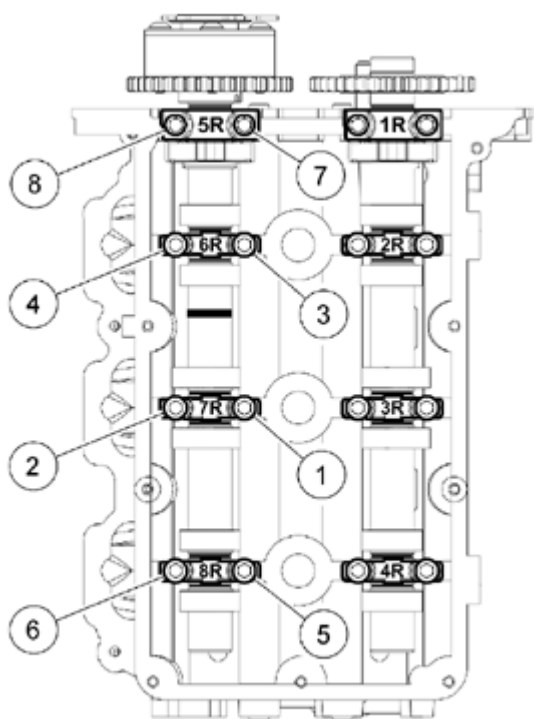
Locating Bolts And Intake Camshaft Bearing Thrust Cap
